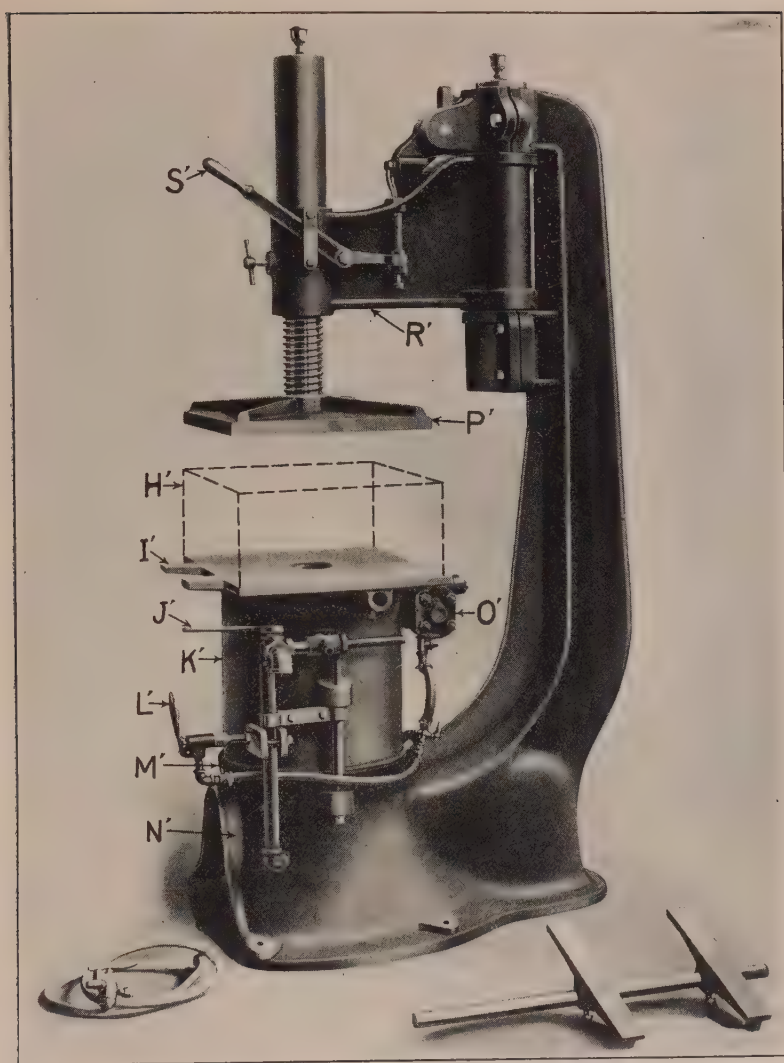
Berkshire's Power Squeezer and Vibrating Machine.
